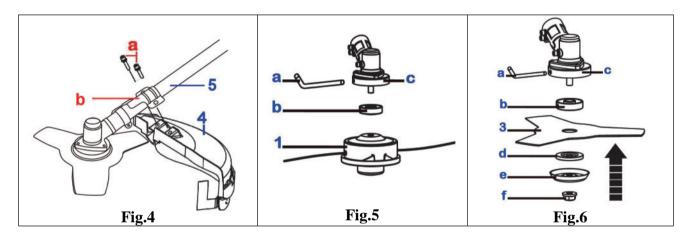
a- Key; b-collar ring; c- gear case; 1- nylon spool
